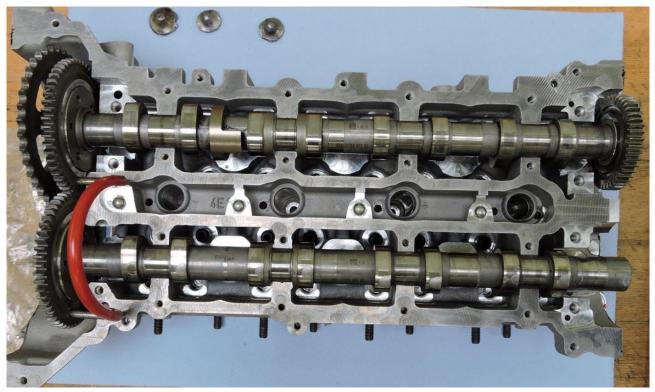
The camshaft gear locked in the correct position using a special tool (with a red plastic handle). The timing chain is to be connected to the camshaft drive wheel on the outside of the intake camshaft gear. Photo: Austrian Civil Aviation Safety Investigation Authority
